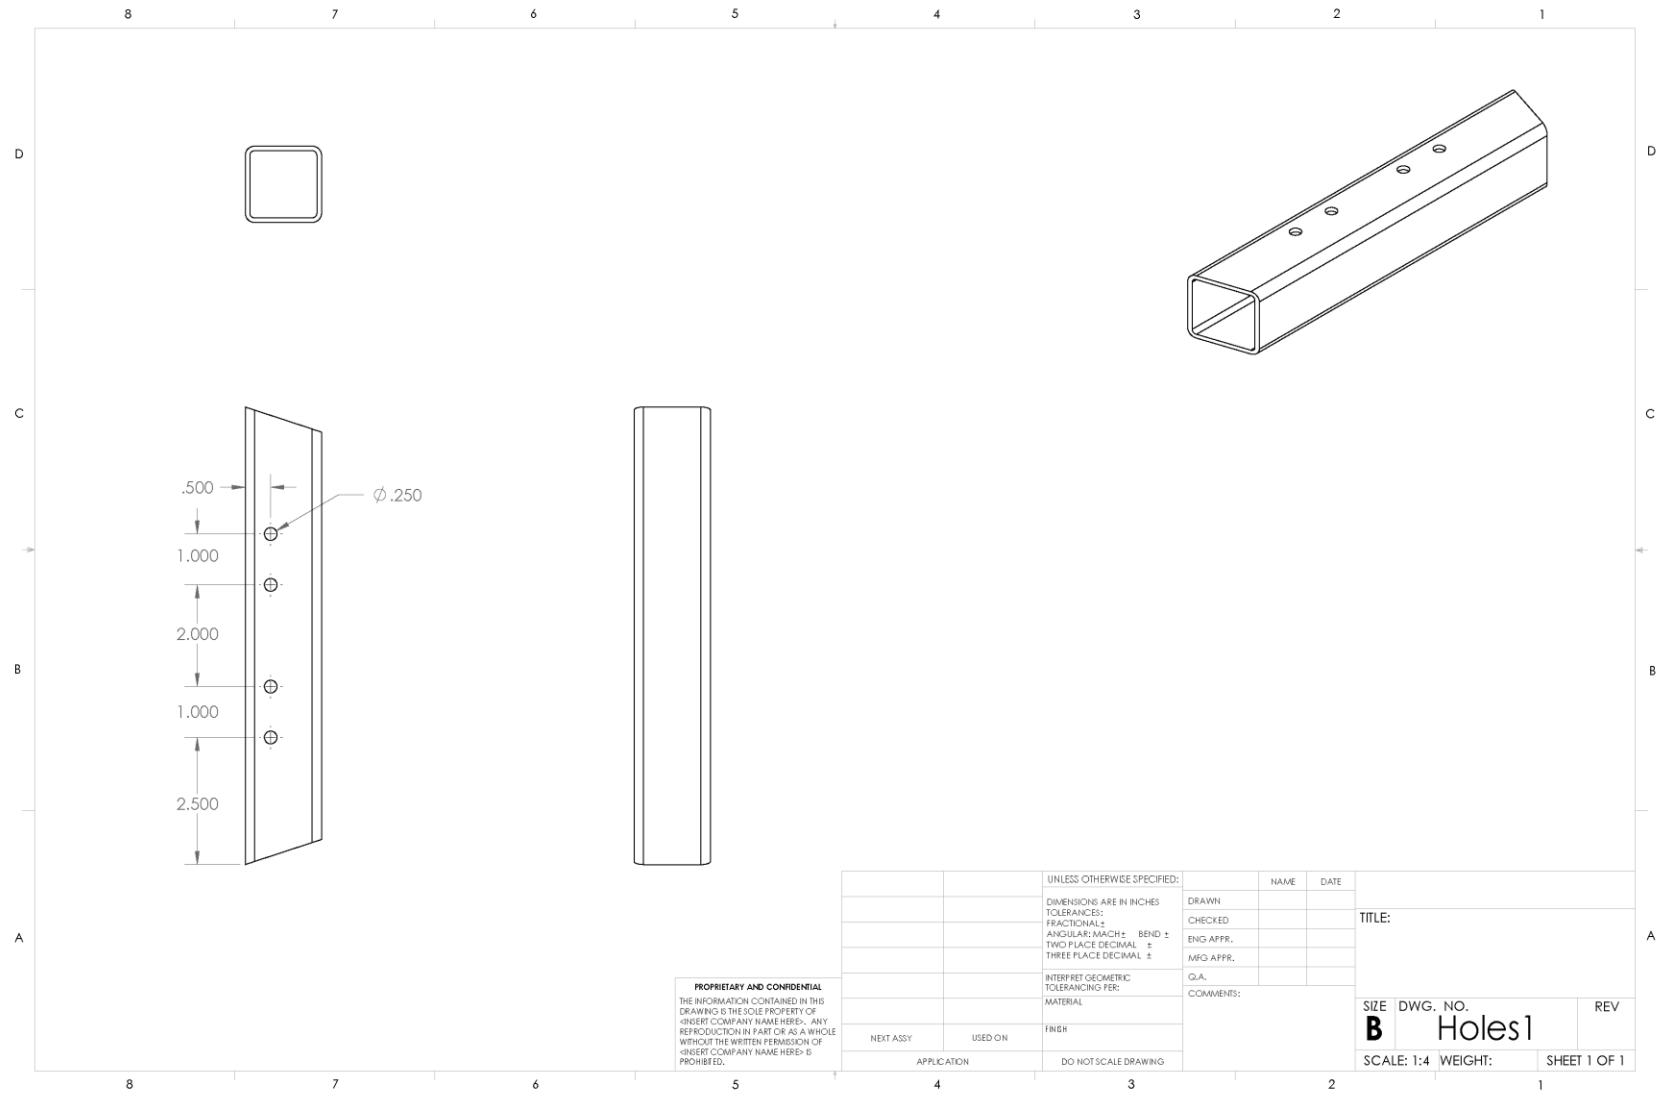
Drawing of Part 1304 with Holes for Mounting U-Bolts
